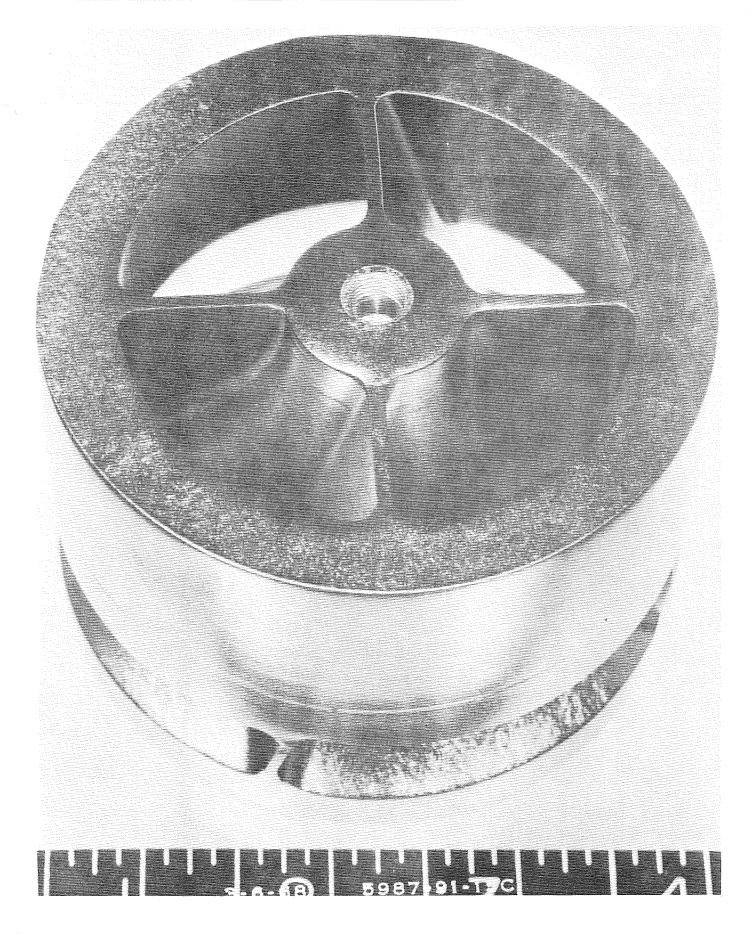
Final Simulated Impeller Showing Inlet Areas After Chem-Milling 0.040 of an Inch Material From All Surfaces.
